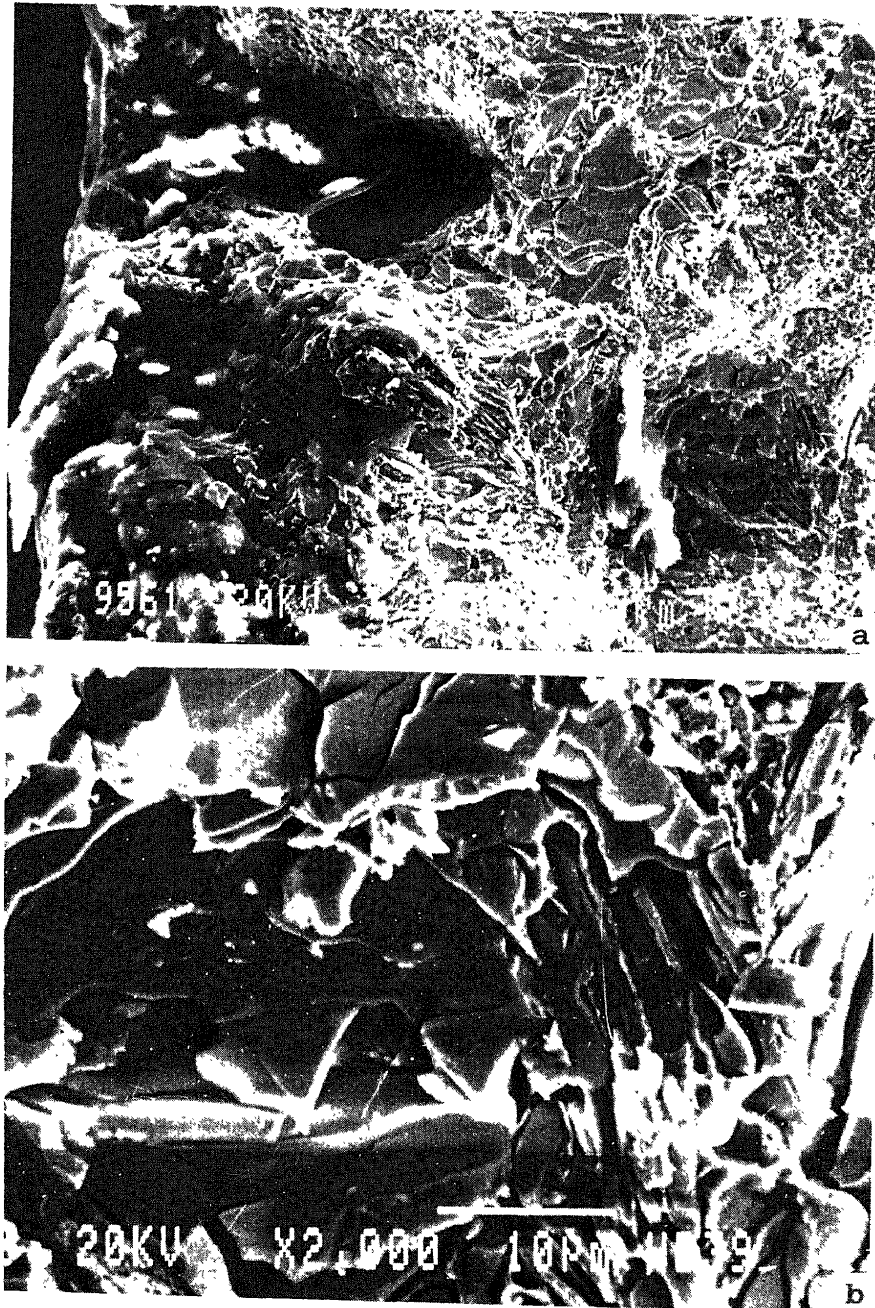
a. SEM fractograph taken close to the edge of the failed container showing interaction zone and fracture by carbide cleavage and b. more clearly seen at higher magnification.
